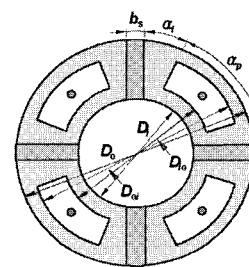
Schematic diagram of the hydrostatic thrust bearings
